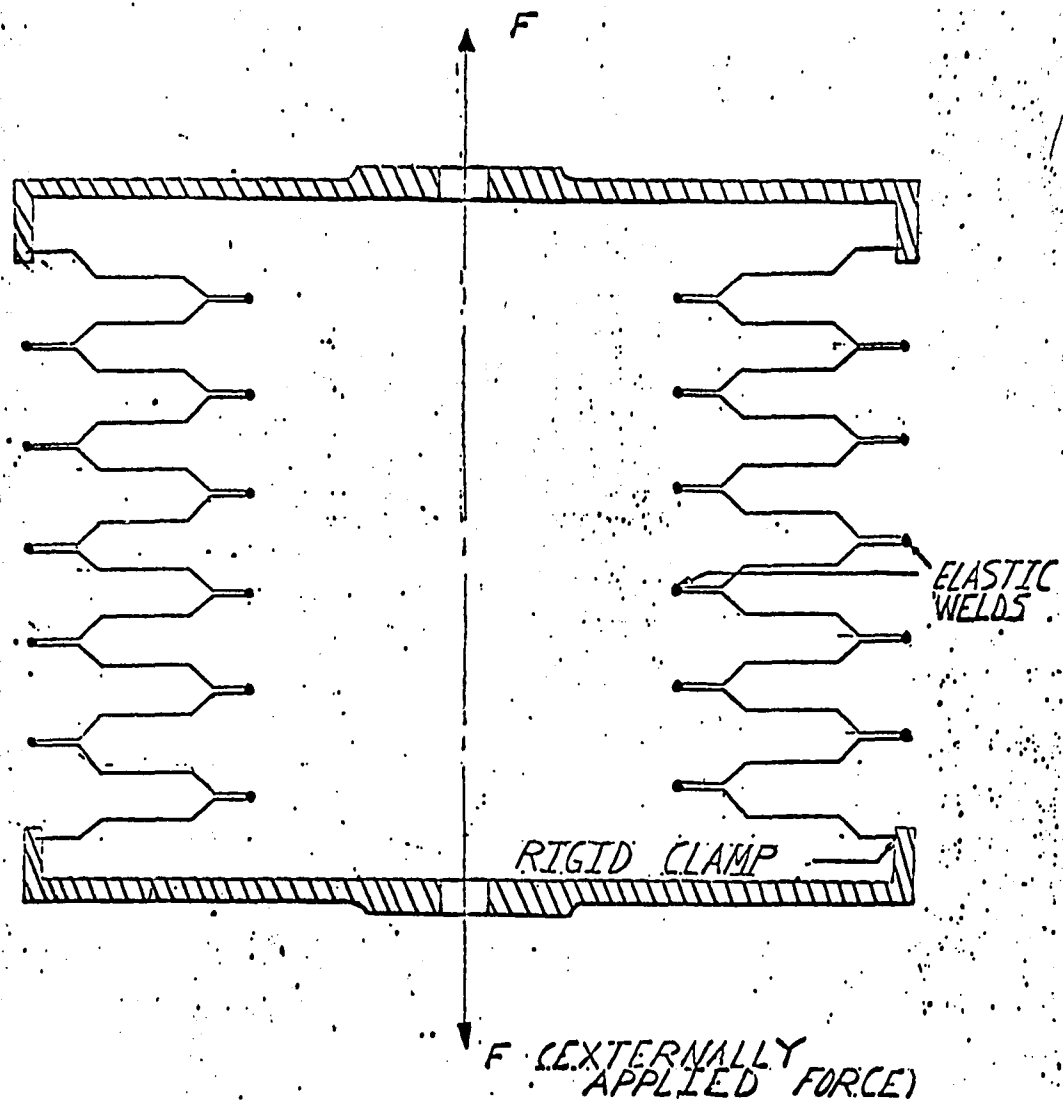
CROSS-SECTIONAL VIEW OF A WELDED BELLOWS WITH TWELVE LAYERS.
